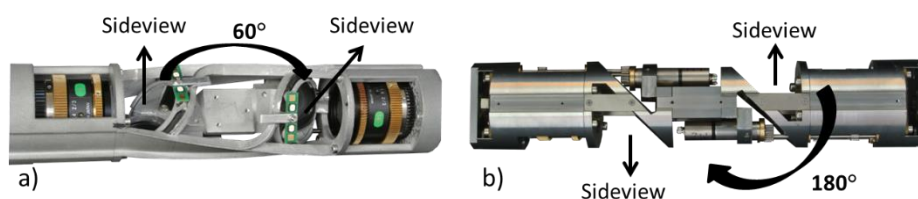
camera unit fabricated using a) SLM and b) cutting.
